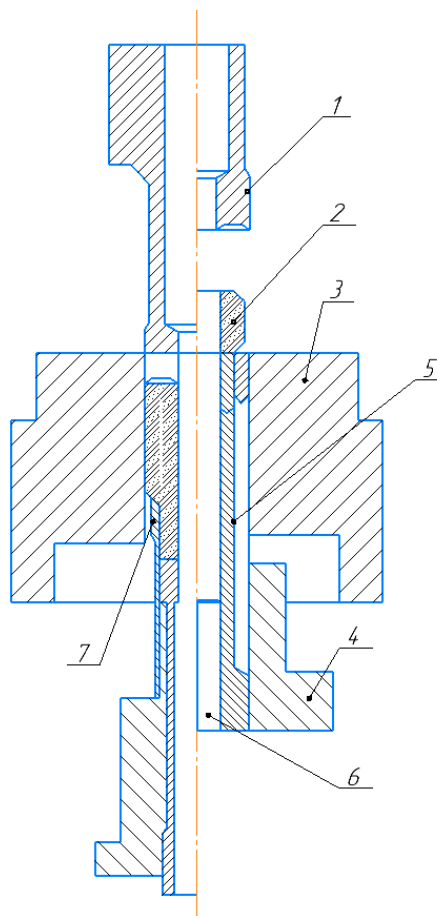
Mold with additional drainage gap: 1 — upper punch; 2 — porous bearing; 3 — matrix; 4 — outer lower punch; 5 — inner lower punch; 6 — rod; 7 — additional drainage gap
